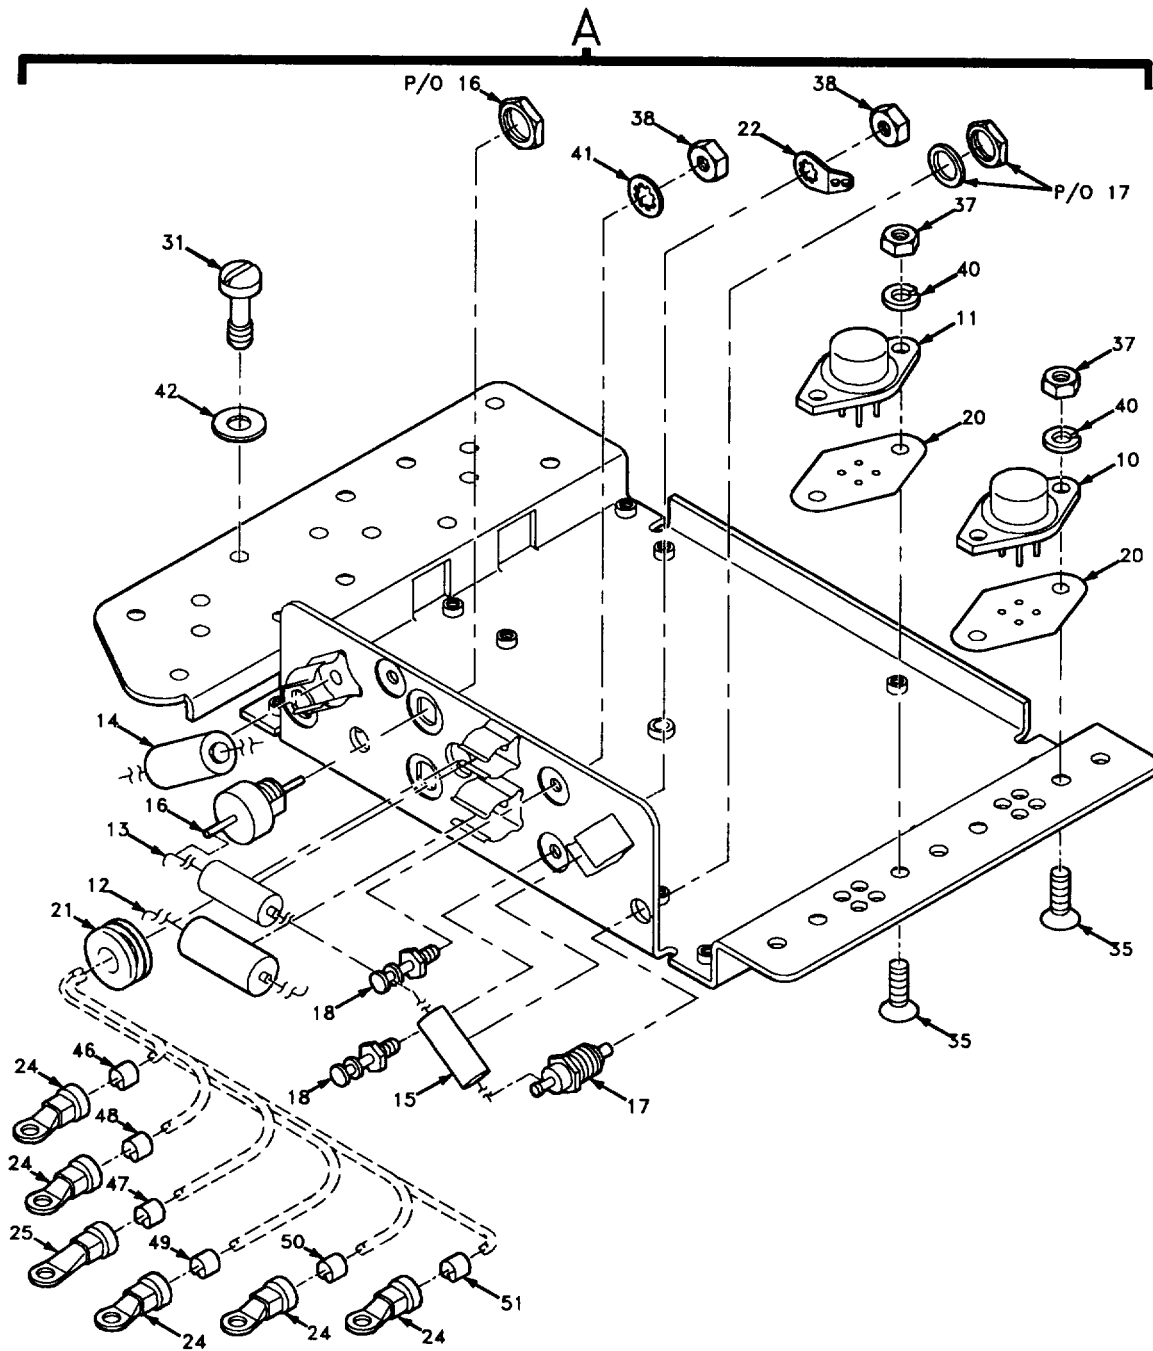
Disassembly of Vehicular-Adapter Power Supply A3148148-1 (Sheet 2 of 2)
